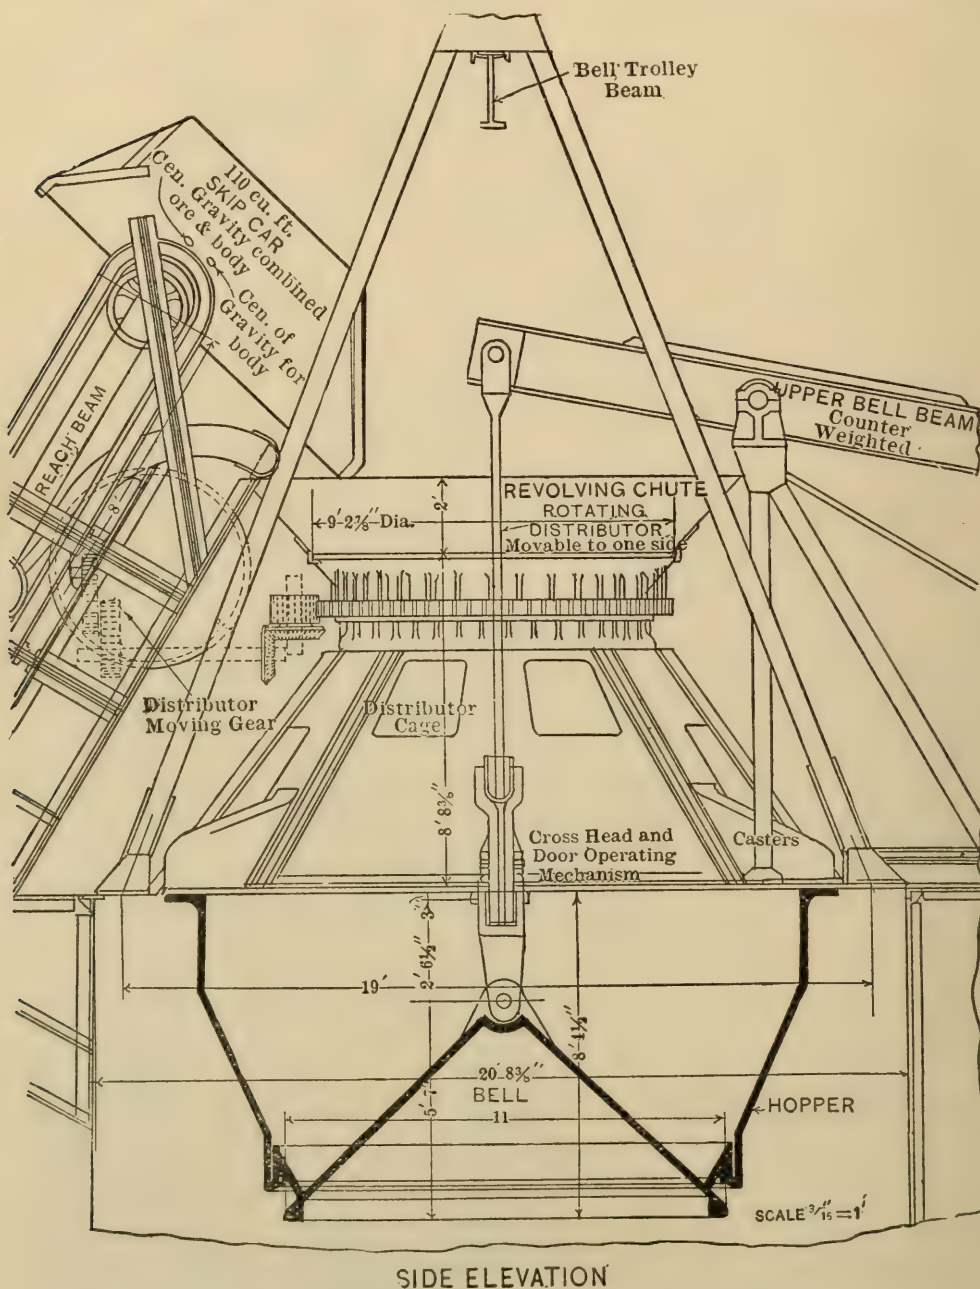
A Distributor and Single Skip with a Double Bell-Rod
